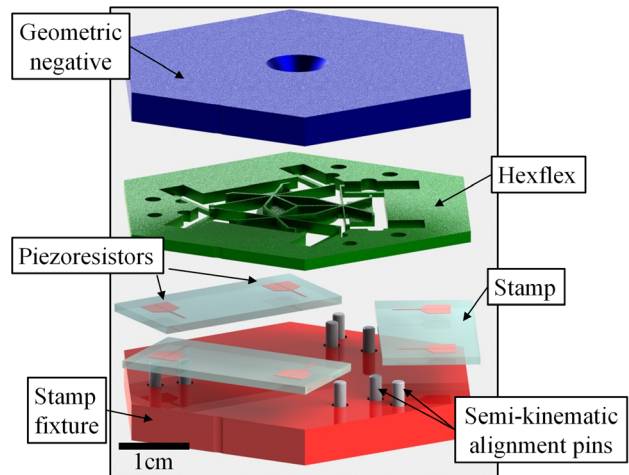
Exploded view of transfer fixture setup, showing main components in the stack. The alignment pins are within the perimeter of the Hexflex so that the stamps can be pressed toward the center to preload.
